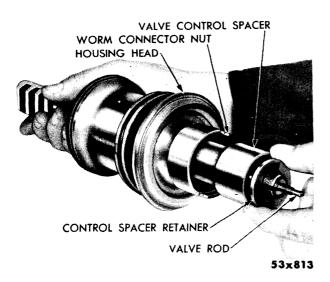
Removing Valve Control Spacer Seal and Seal Assembly
